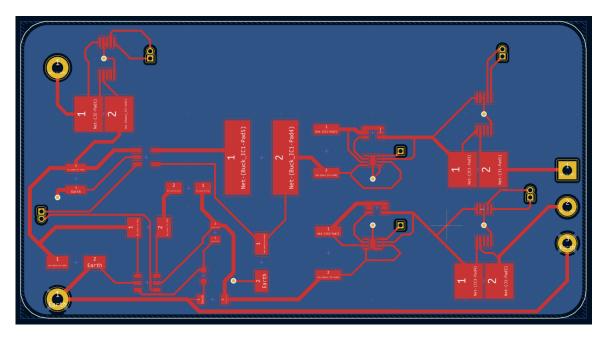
Buck and Boost circuit PCB - All Copper Layers only
